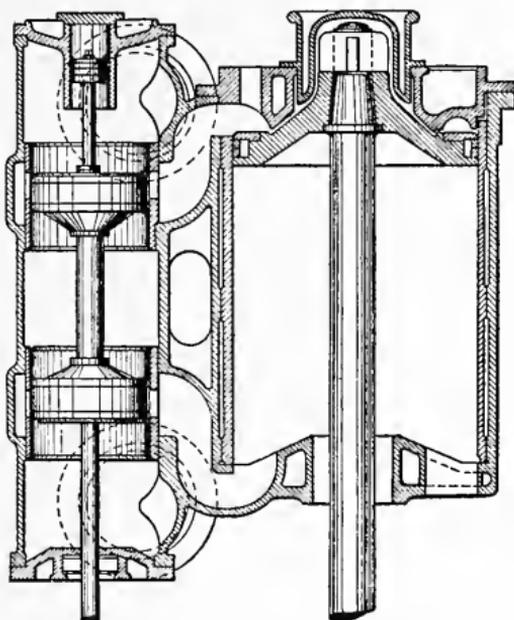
Sectional View of Marine Engine Cylinder, Piston and Steam Ports
